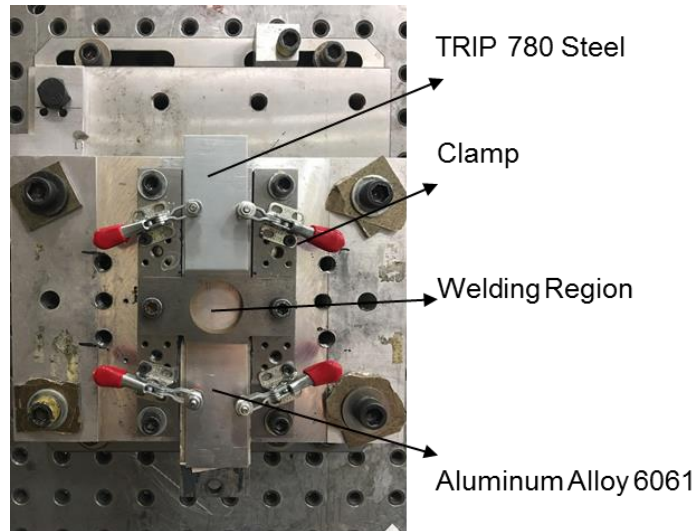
Fixture setup for the keyhole refilled FSSW
